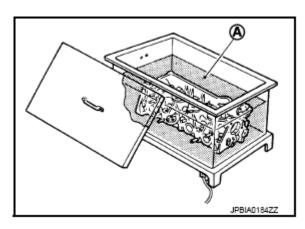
Heating Cylinder Head To 110 To 130°C Courtesy of NISSAN NORTH AMERICA, INC.
